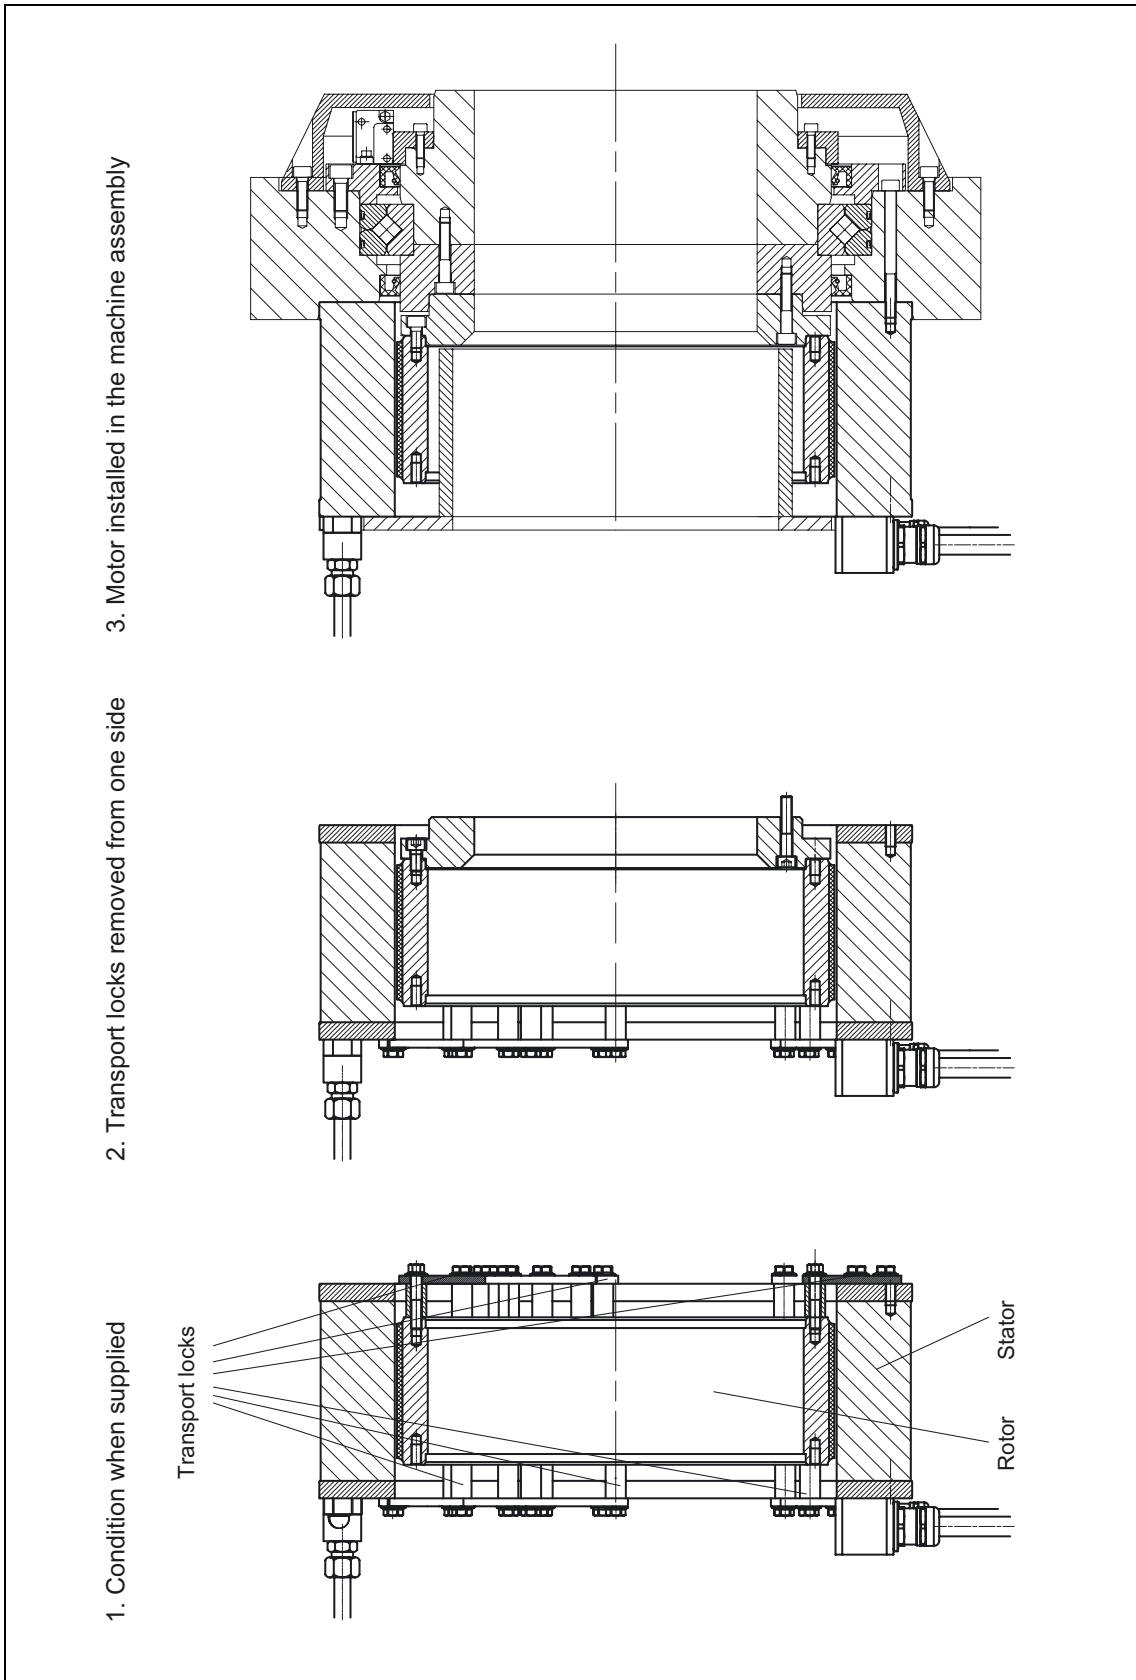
Steps when installing the torque motor at the shaft end of a swiveling drive
